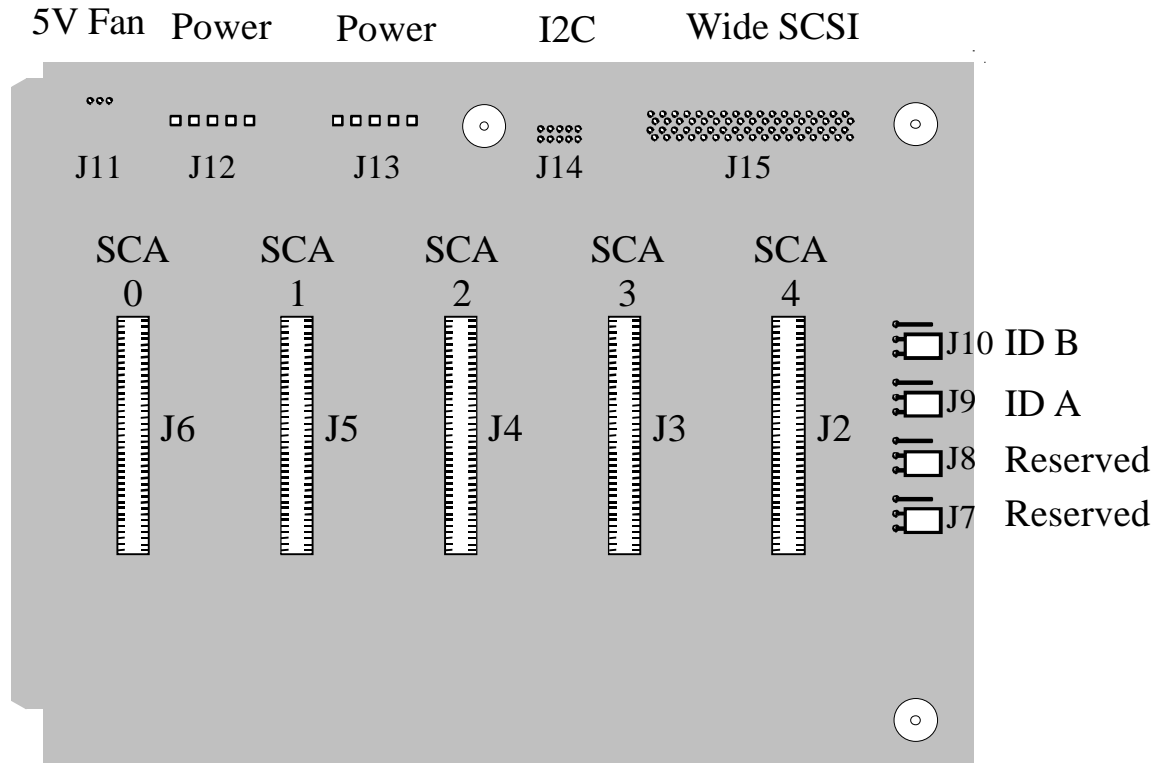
Hot-swap SCSI Backplane Component and Connector Layout
